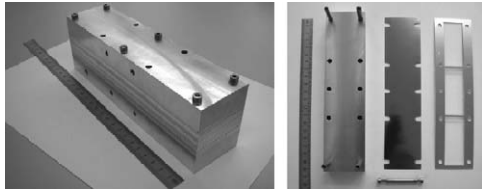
Left: picture of the assembled steel foil collimator for a beam cross-section of $26 \times 26 \text{ mm}^2$. Right: one of the aluminium base-plates ($200 \times 50 \times 20 \text{ mm}^3$), a coated steel foil and an aluminium frame spacer. The three windows in the spacer have a width of 26 mm.
